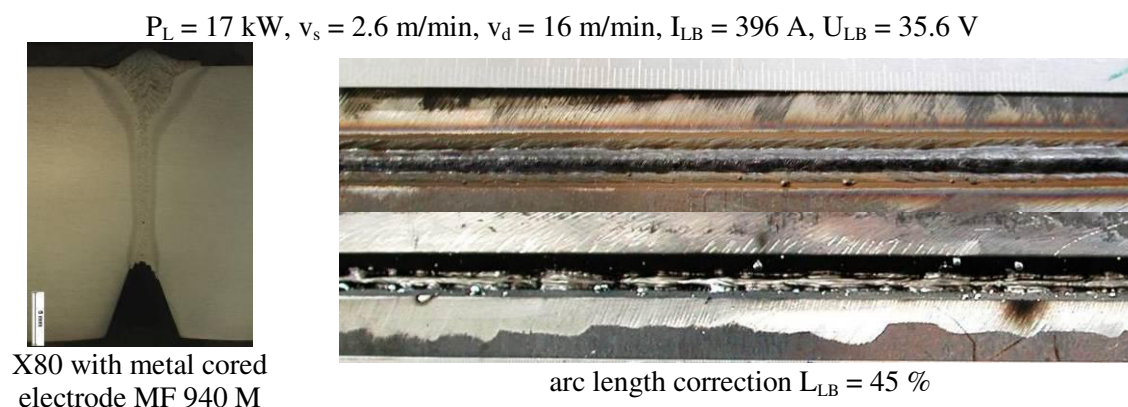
Welding with modified spray arc and optimised arc length
